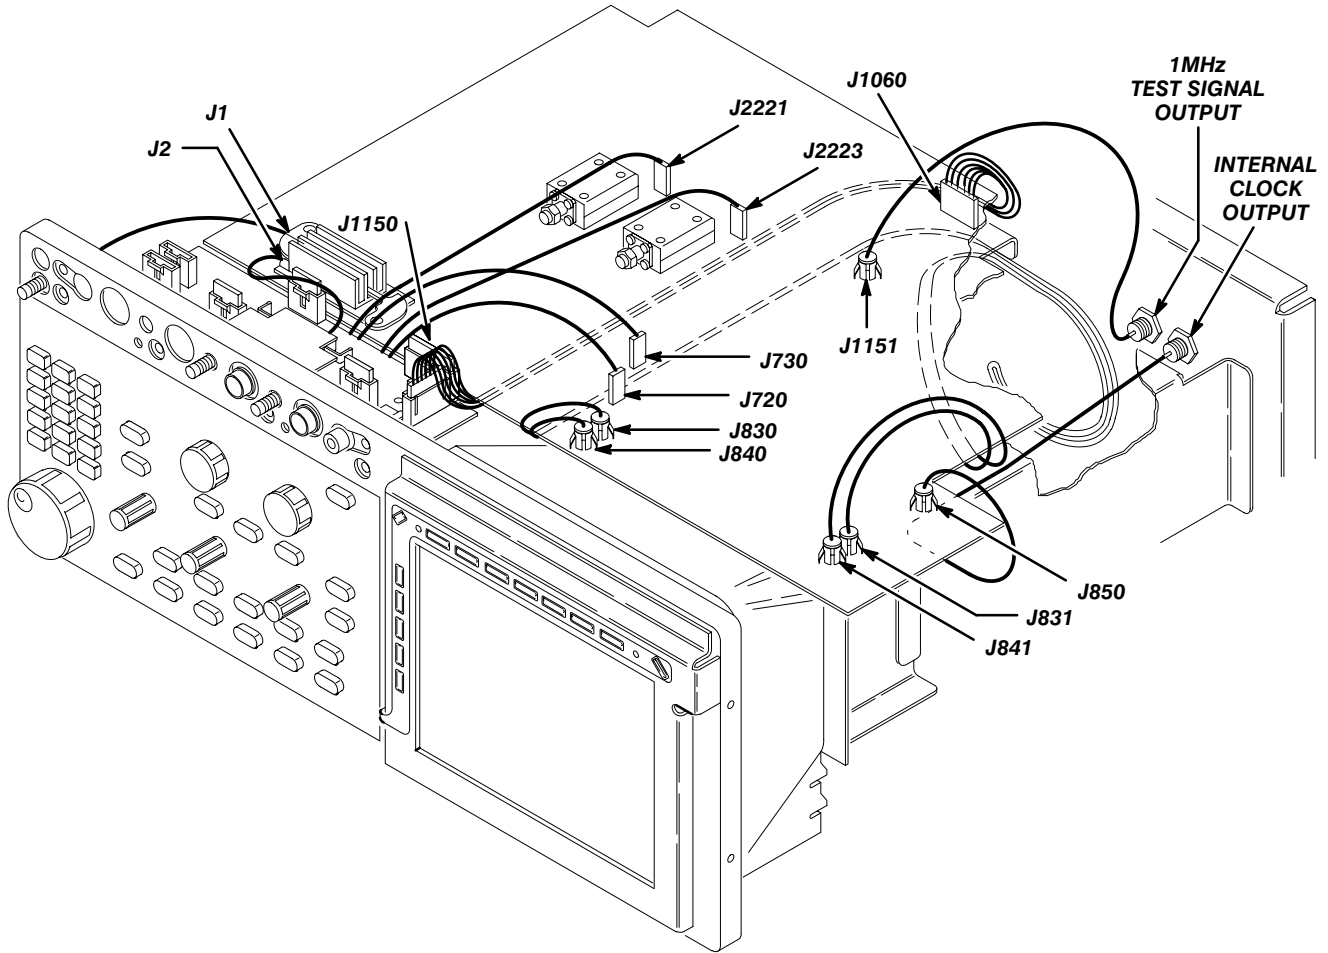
Delay Lines, Sampler Modules, and A10 Acquisition Board Removal
